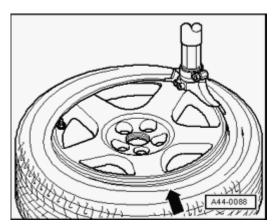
Mounting Tire Courtesy of VOLKSWAGEN UNITED STATES, INC.
